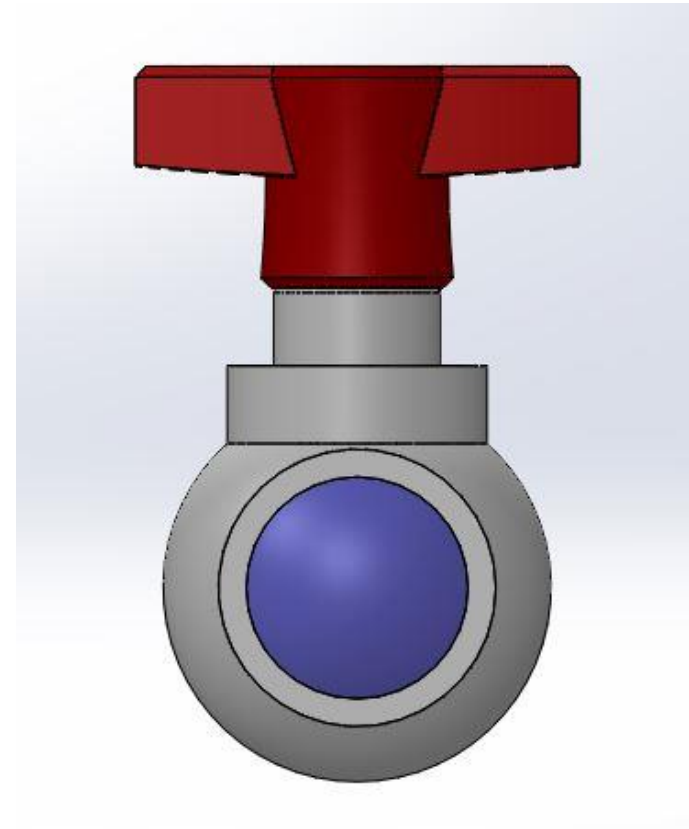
Full SolidWorks assembly of ball valve in closed position.
